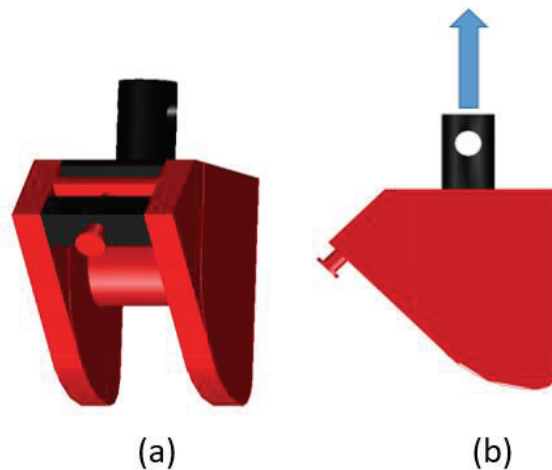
72 : 3D and profile drawings of the yarns' mechanical grip system.
